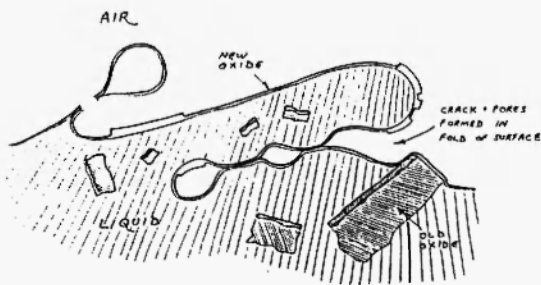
Surface entrainment leading to the formation of cracks and pores.
